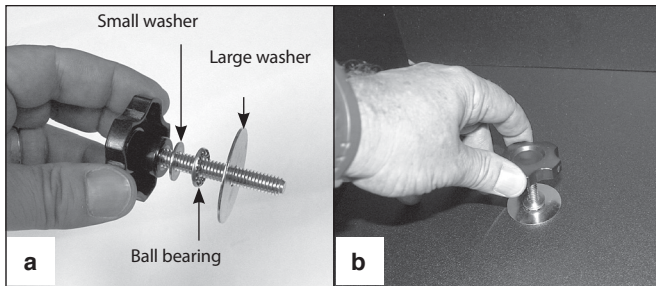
a) Place the two washers and roller bearing ring on the azimuth tension bolt as shown. b) Then thread the bolt into the center hole (metal insert) and tighten to the desired tension.
